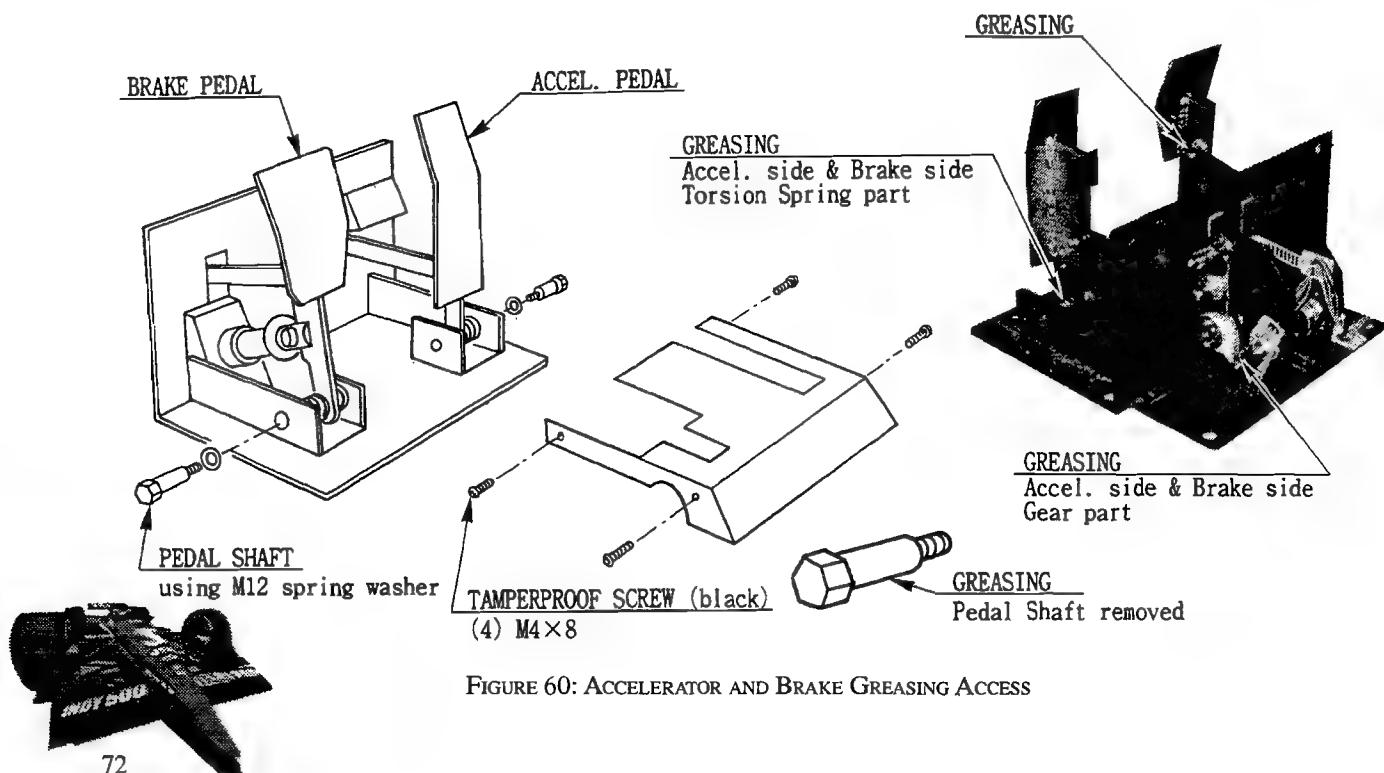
ACCELERATOR AND BRAKE GREASING ACCESS
